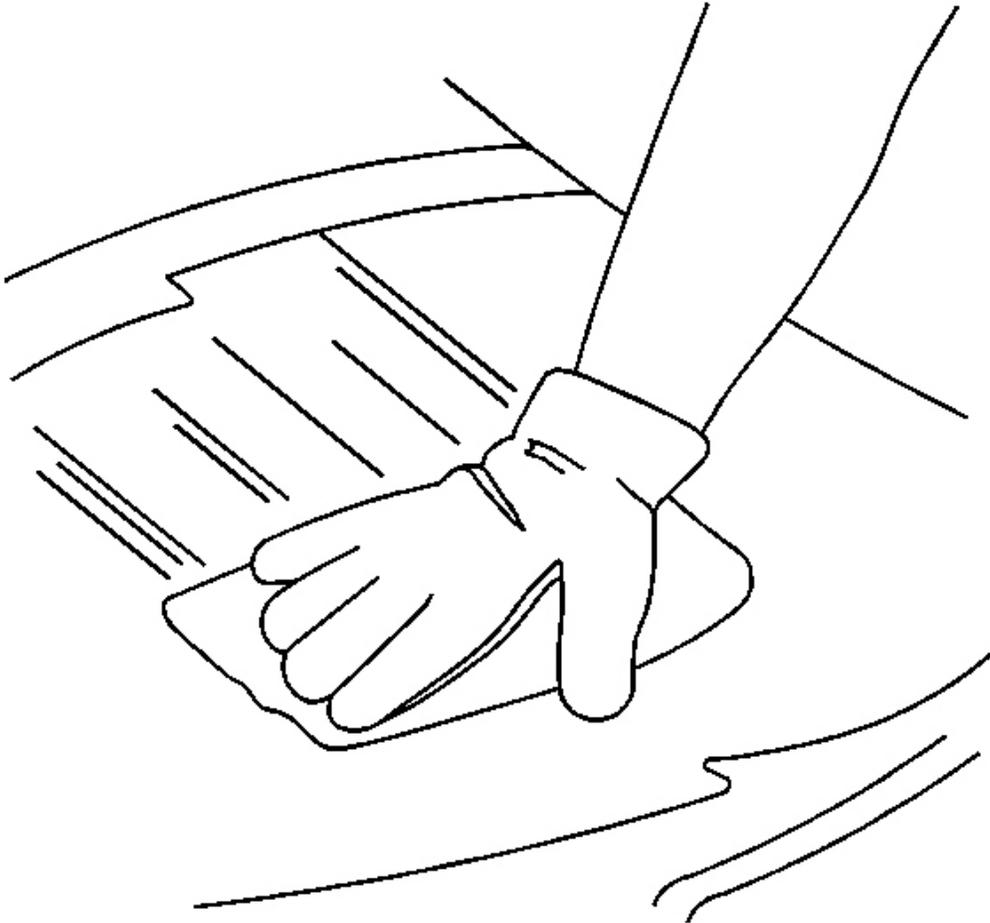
Identifying Masking Taped Windshield Location In Opening
